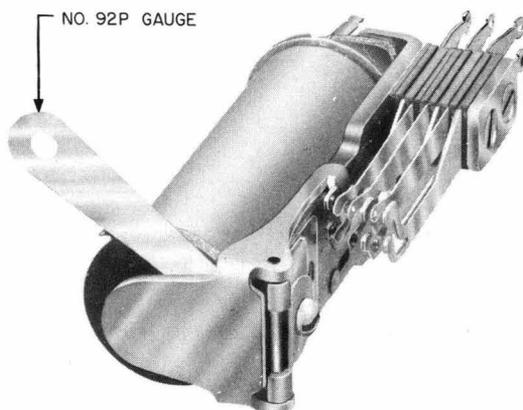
Fig. F - Position of Gauge for Adjusting Heelpiece Airgap
